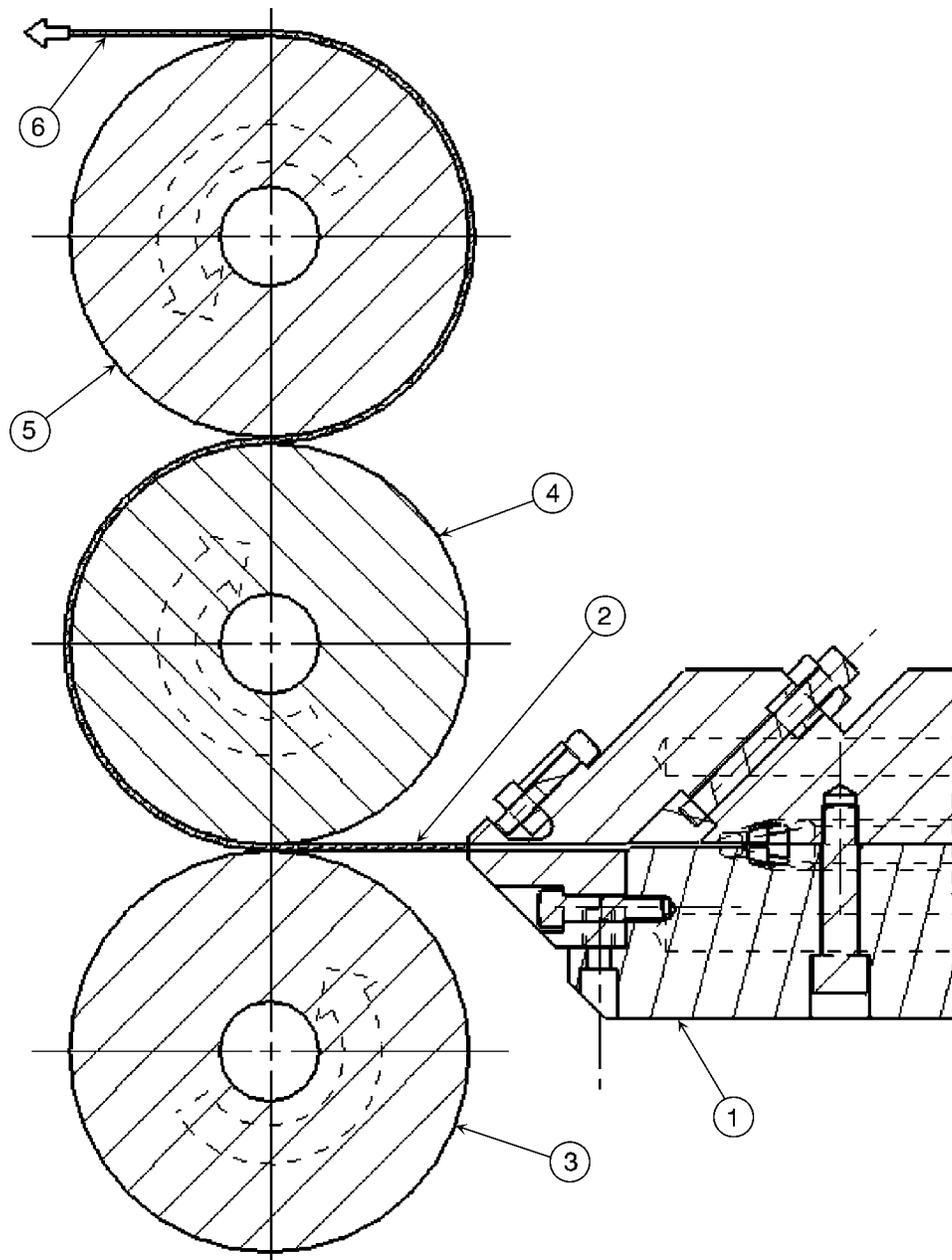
Chill roll stack for sheet extrusion: (1) sheet die with flow restrictor; (2) molten sheet extrudate; (3) lower chill roll (all chill rolls temperature controlled); (4) middle chill roll (imparts gloss/surface texture to sheet); (5) upper chill roll; and (6) solidified sheet.
